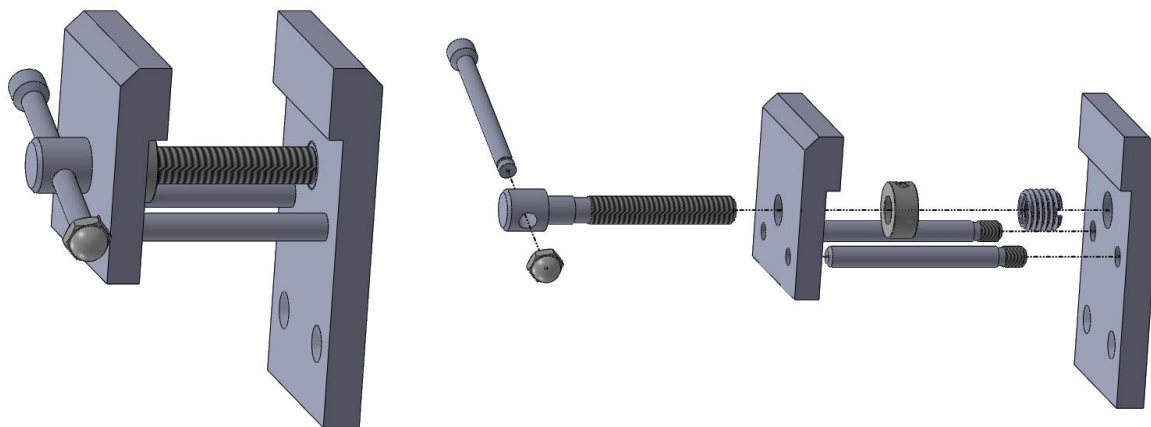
SolidWorks™ assembled (right) and exploded (left) views of 2013 Bench Vise assembly.
